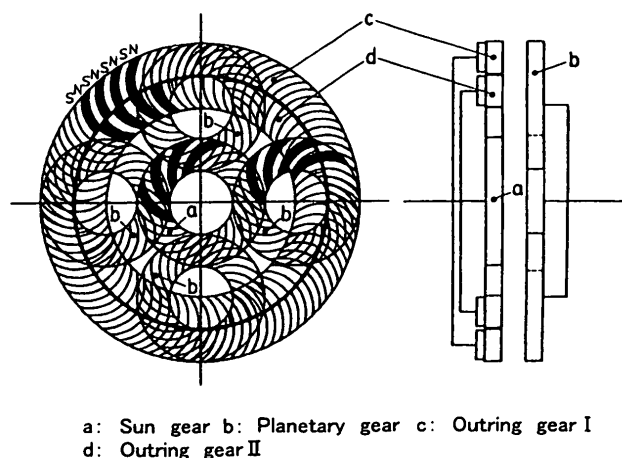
Schematic drawing of a new mechanism for planetary and differential gearing.
